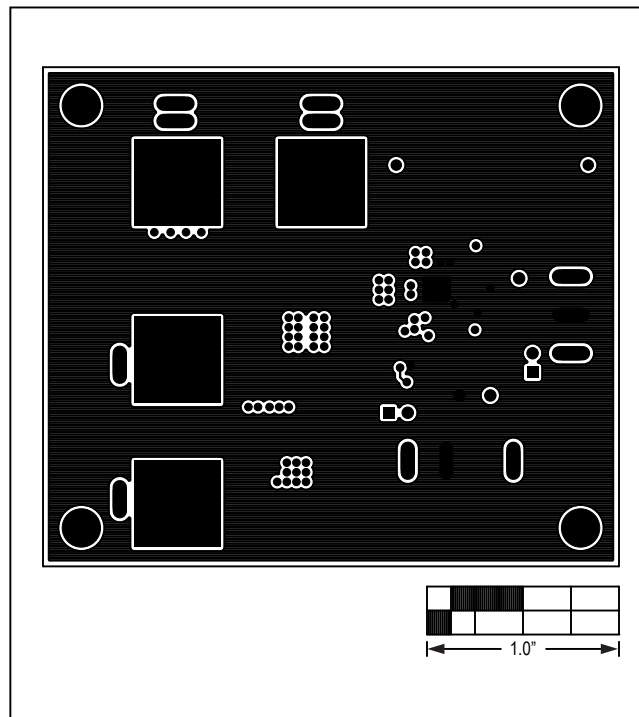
MAX16962R EV Kit PCB Layout—PGND Layer 2
